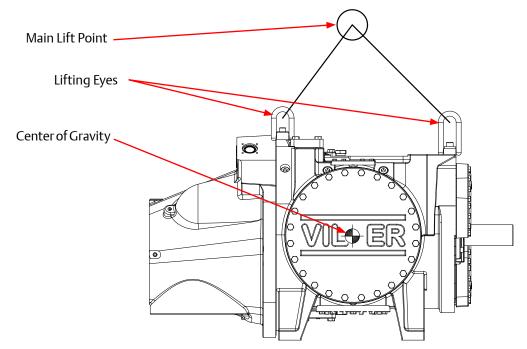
Bare Shaft Compressor Assembly Center of Gravity (Models 2401-3001)
